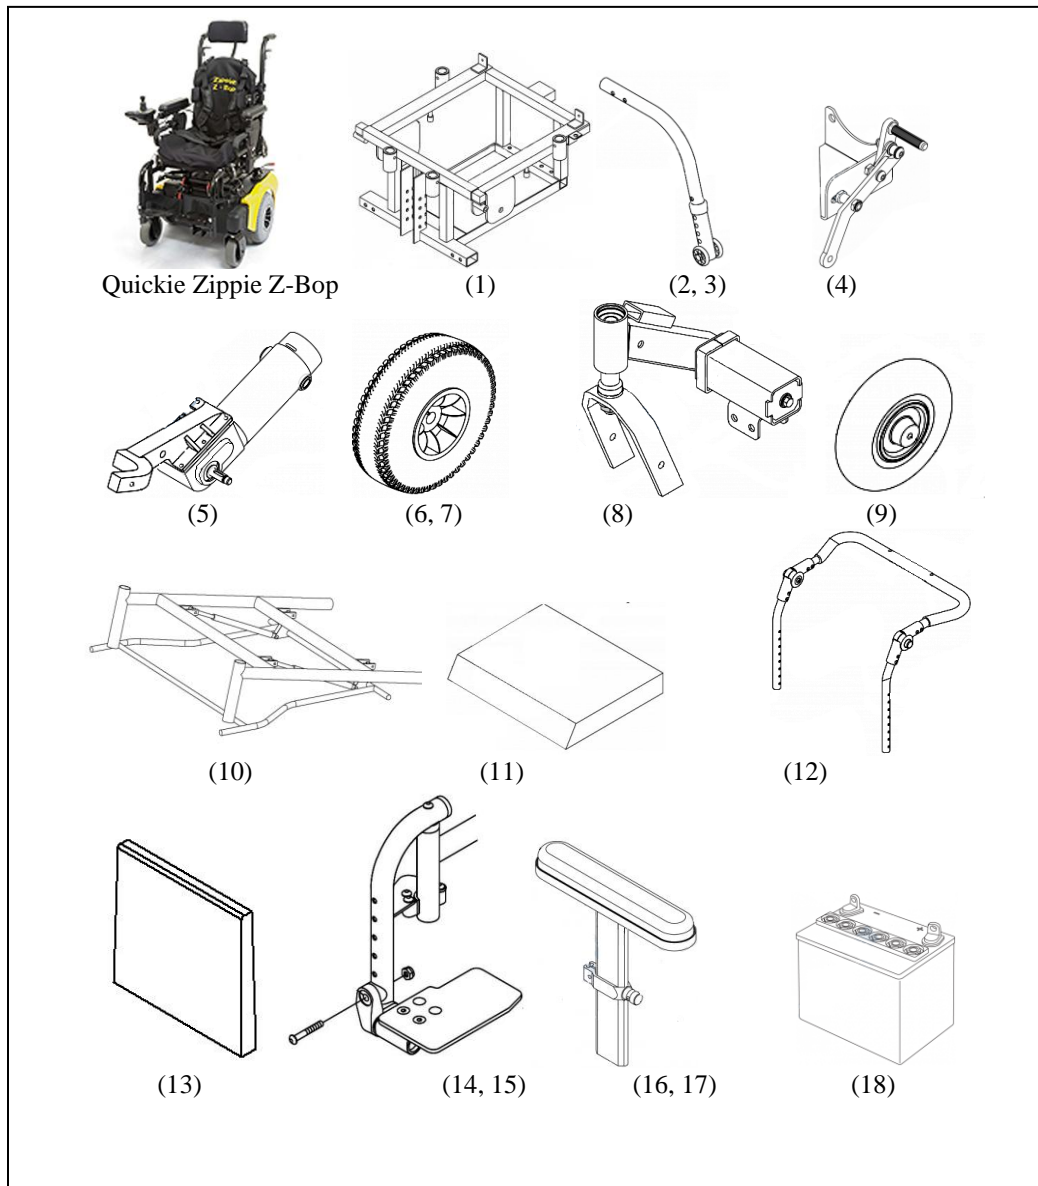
The Exploded view of Quickie Zippie Z Bop
